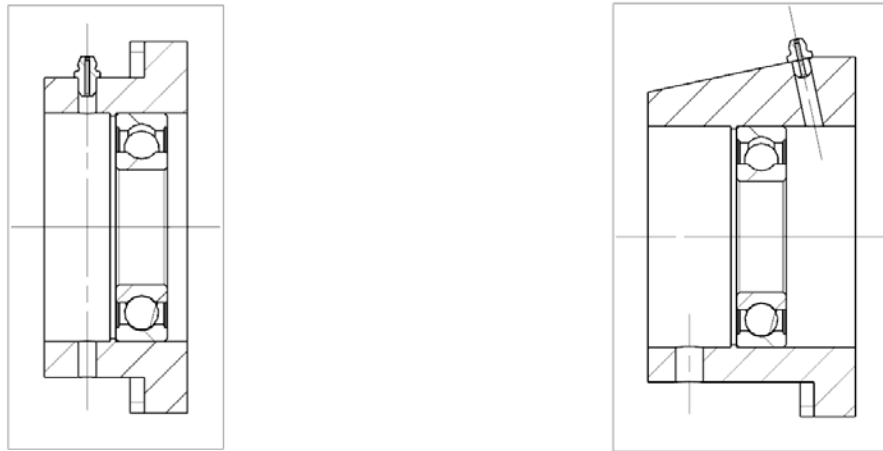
Bearing Housings 1 and 2 (left and right respectively)
